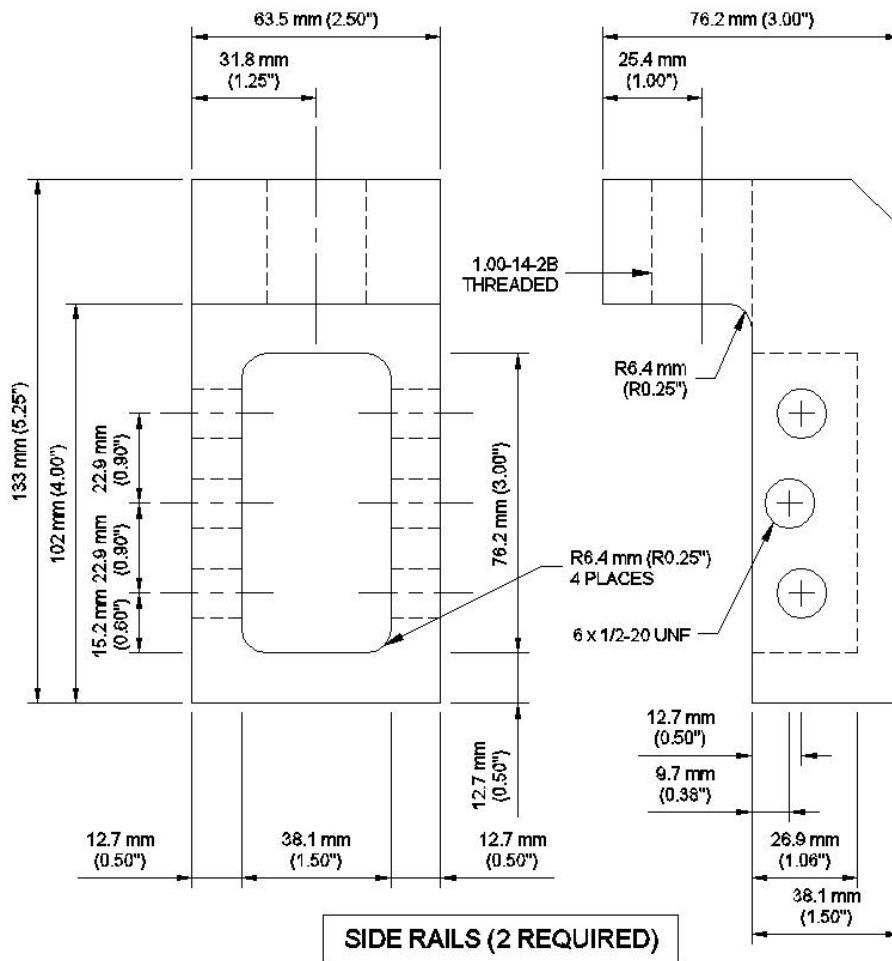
NEW TWO-RAIL SHEAR TEST FIXTURE SIDE RAILS
